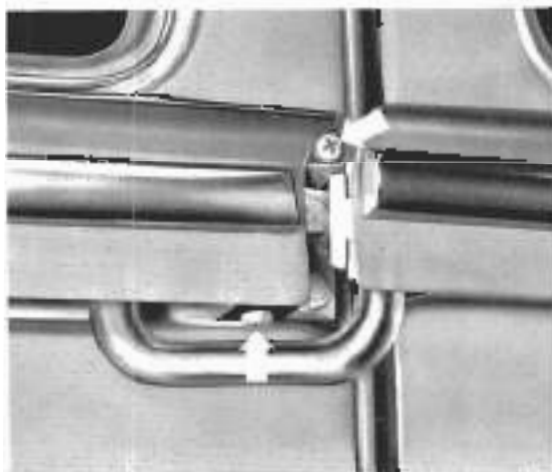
Phillips head screw (arrow) at the front of the outside runner cover
